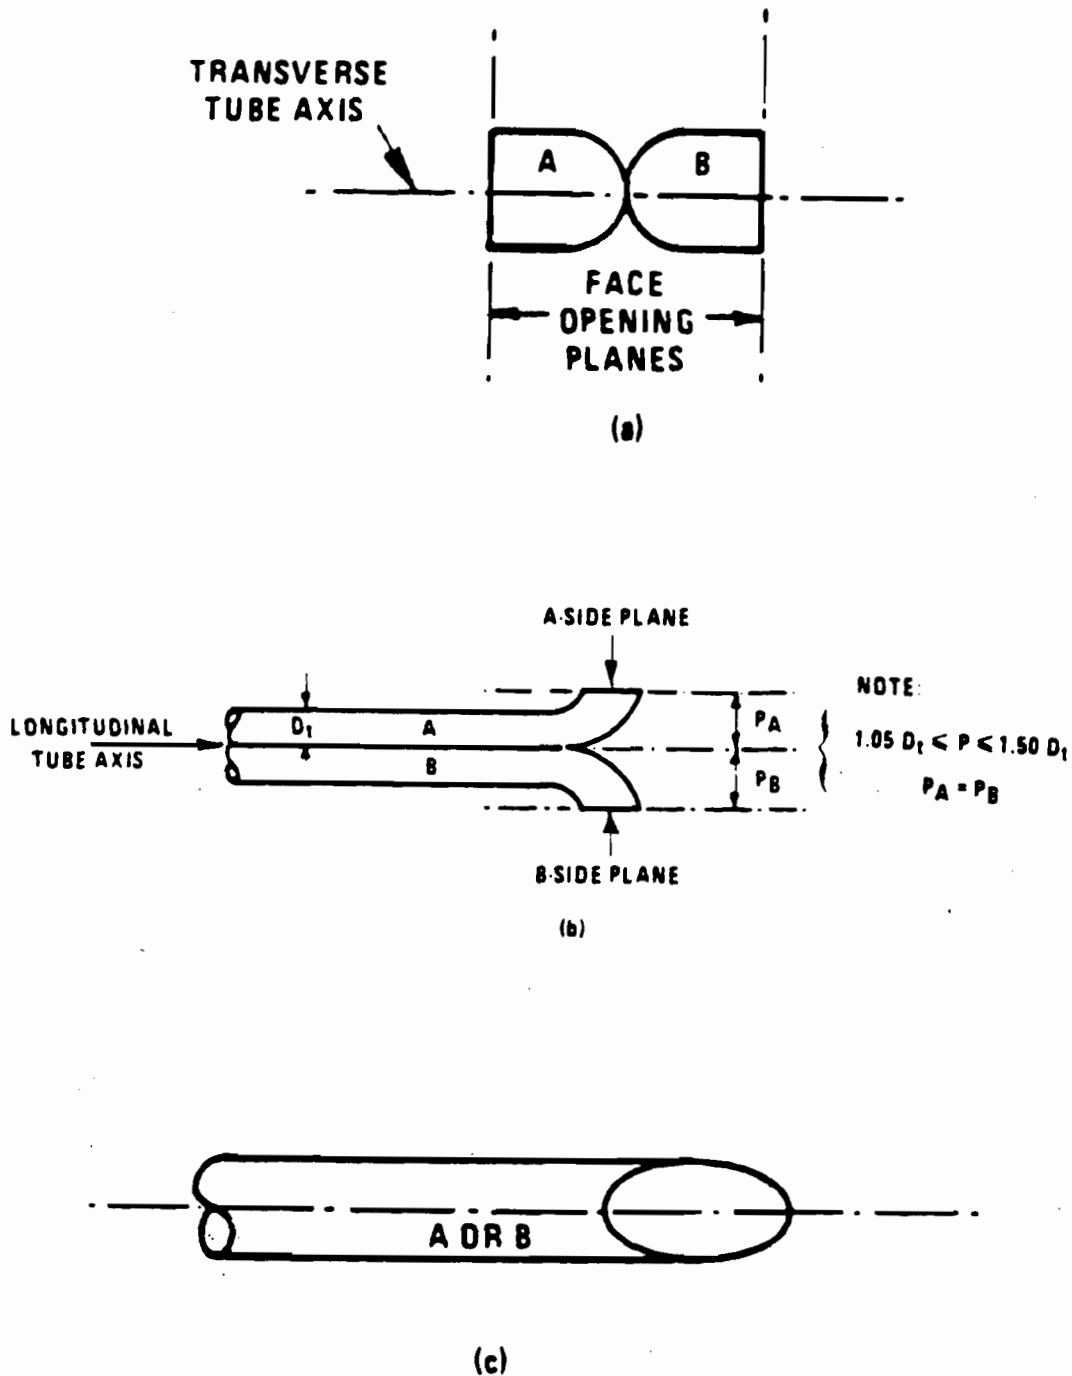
Properly constructed Type S pitot tube, shown in: (a) end view: face opening planes perpendicular to transverse axis; (b) top view: face opening planes parallel to longitudinal axis; (c) side view: both legs of equal length and centerlines coincident, when viewed from both sides. Baseline coefficient values of 0.84 may be assigned to pitot tubes constructed this way.
